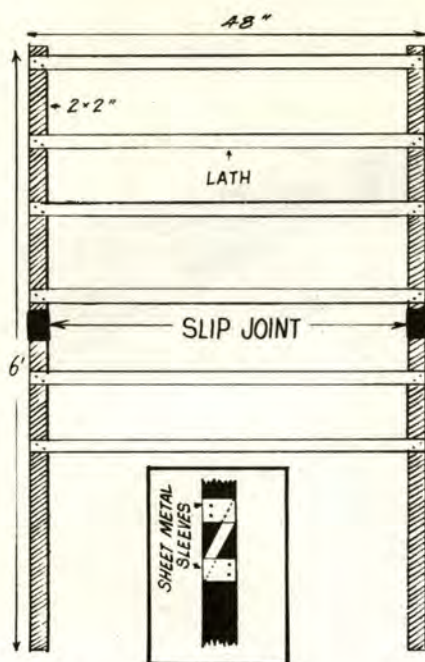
Sketch shows dimensions and constructional details of a portable patterning frame. Inset shows how sheet metal sleeves are employed to make a slip joint which permits frame to be disassembled into two pieces for transporting in car trunk. Sleeves should be formed and fastened to the wood 2x2" uprights with 2 screws on each side.
